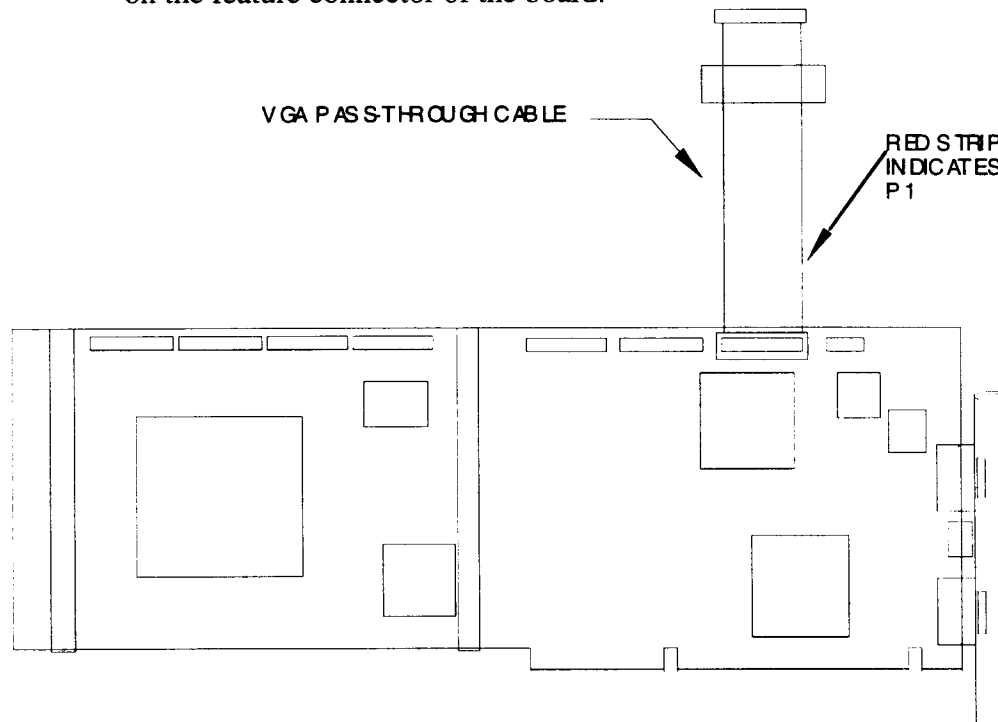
Frame Grabber Board and VGA Pass Through Cable
